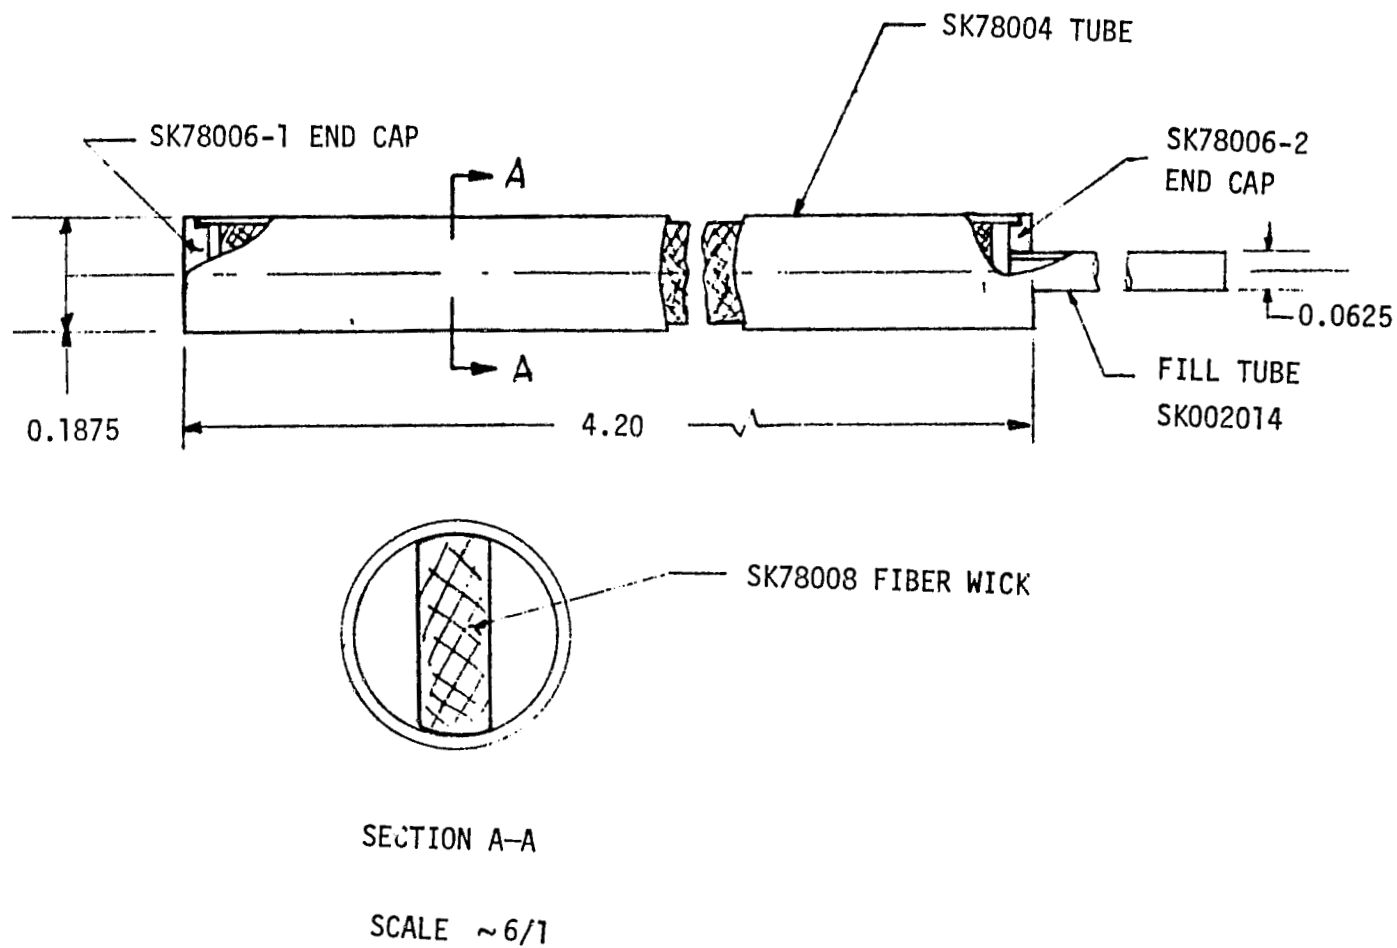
HEAT PIPE COOLED MAGNETIC - INDUCTOR HEAT PIPE ASSEMBLY
